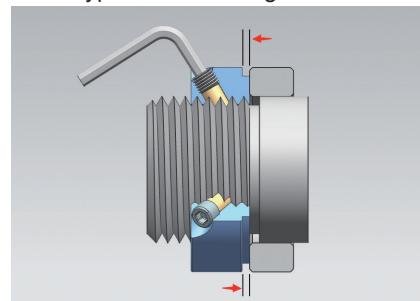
Adjustable thread end face for inaccuracies or deviations from other components on the shaft
